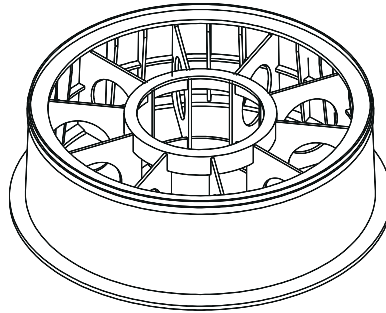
The Unterlafette: a large-scale part requiring machining, assembly, and welding.
